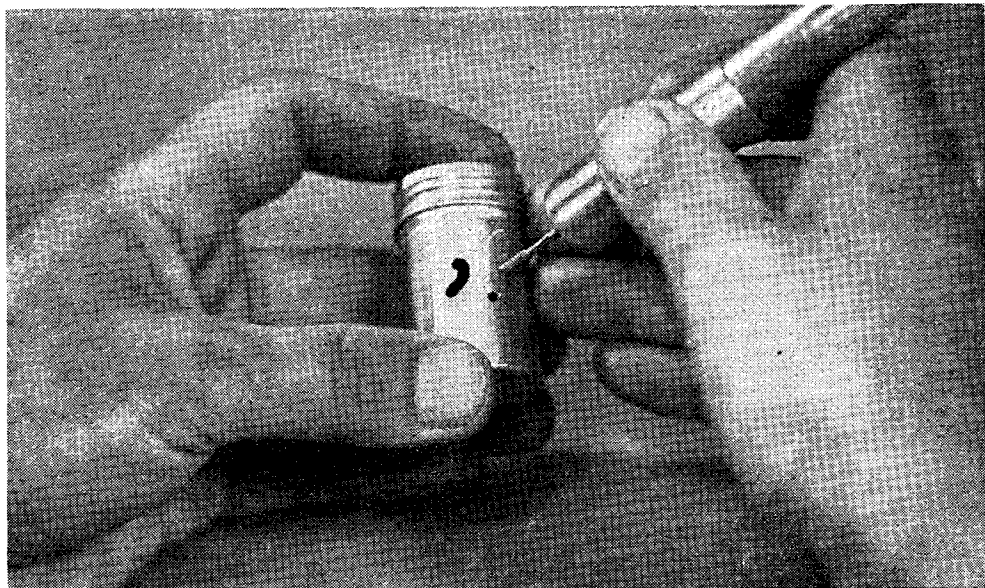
Drilling hand-piece held in the pen grip position, stabilised by the third and fourth fingers resting on the work-piece. Fissure type dental drill in hand-piece, showing circular and profiled holes drilled in thin aluminium container
